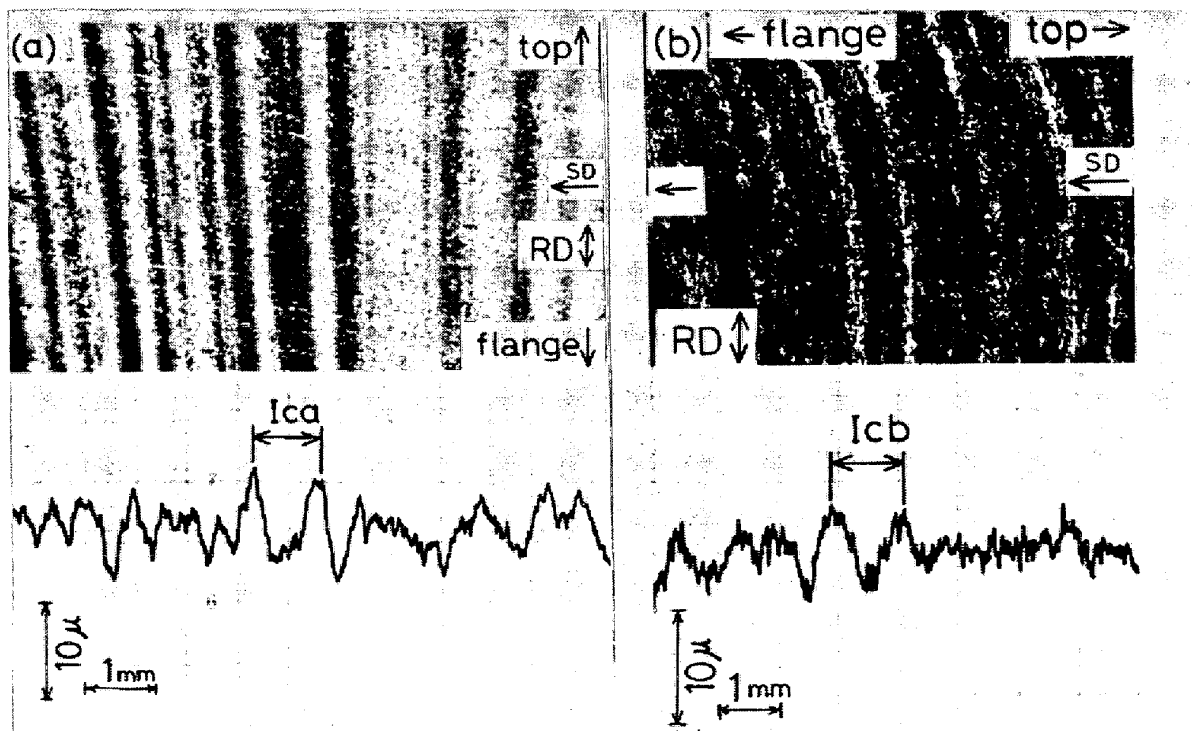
Appearances and profiles of ridging on the wall of deep drawing cup.
